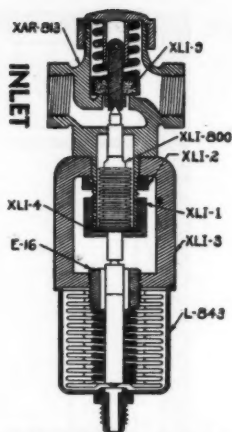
CROSS-SECTION OF PENN WATER REGULATOR
